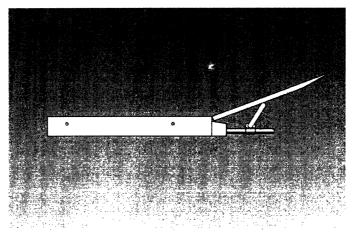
Side view solid model of the ramp tilt mechanism, utilizing a motor and lead screw.
